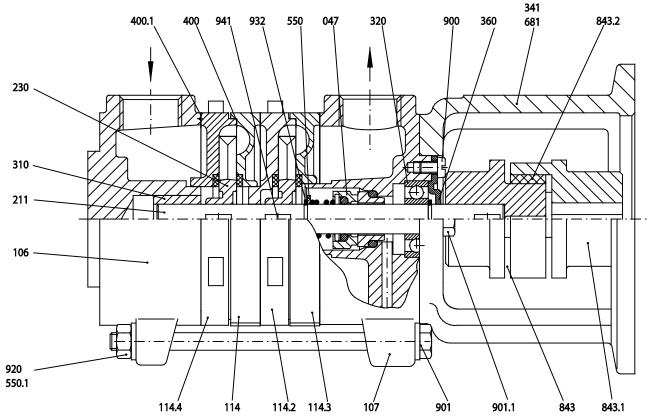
Cross-sectional drawing HY0282H2xx (material version 60 = stainless steel)
